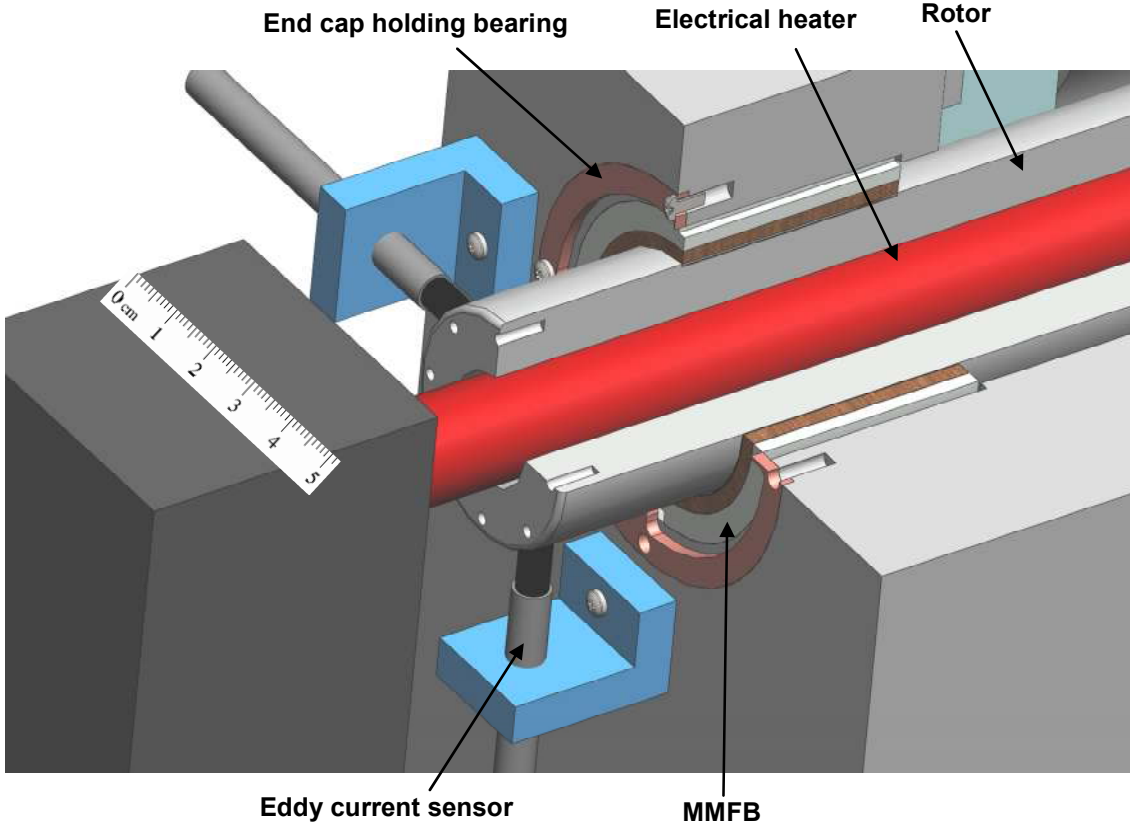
Sectioned view of test rotor and bearings inside their housing
